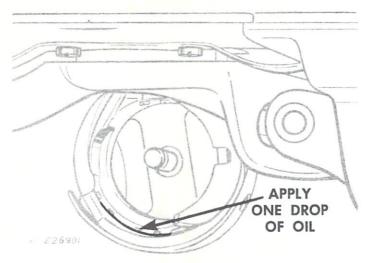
Oiling Sewing Hook Race on Machine 196K5
